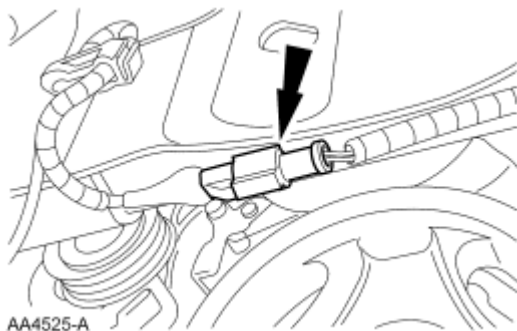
Right Front Anti-Lock Brake Wheel Sensor Electrical Connector
